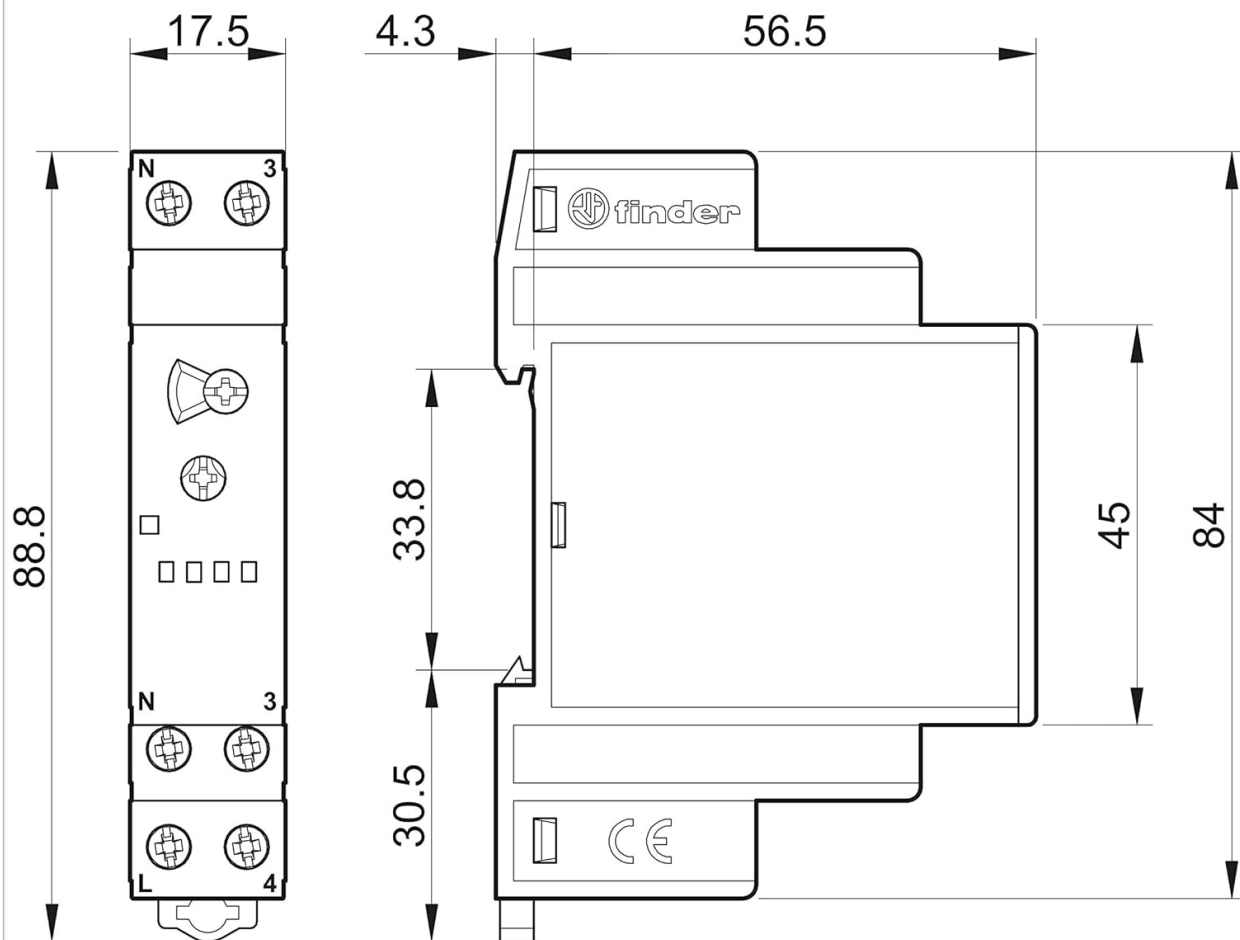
Dimensional drawing for the Type 14.01 relay, showing height, width, and depth in millimeters. This diagram is crucial for planning installation space.
